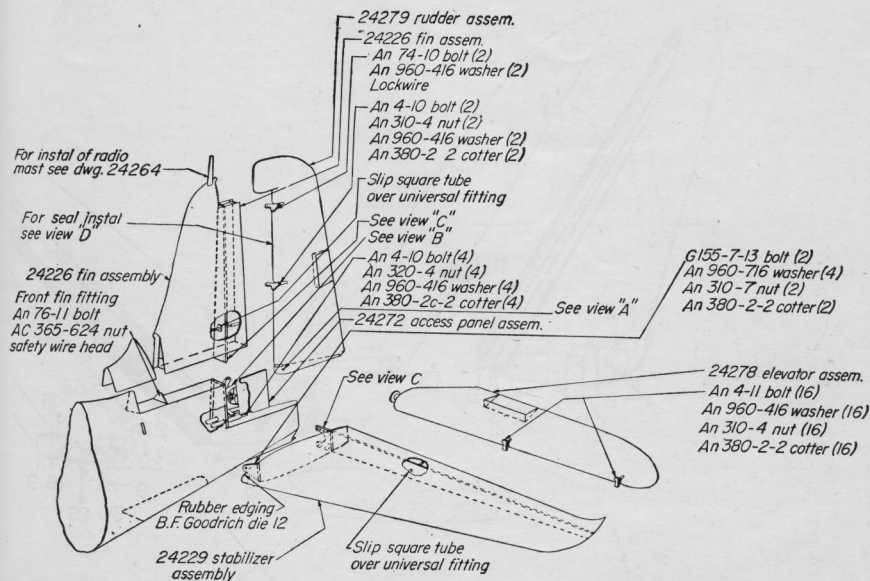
Exploded view showing the major components of the Grumman F6F Hellcat empennage.
